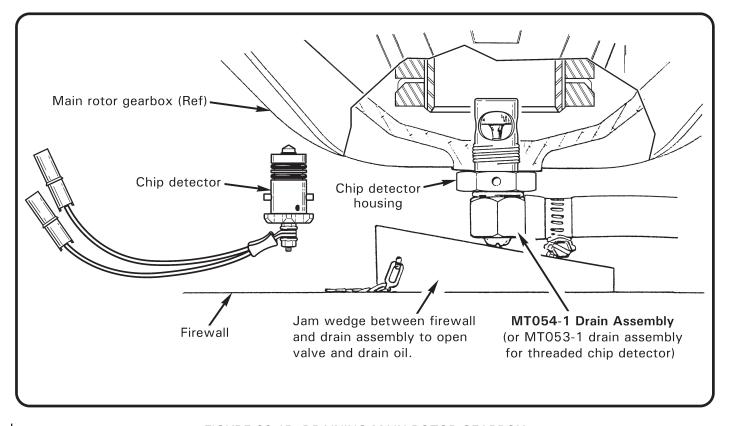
B DRAINING MAIN ROTOR GEARBOX
